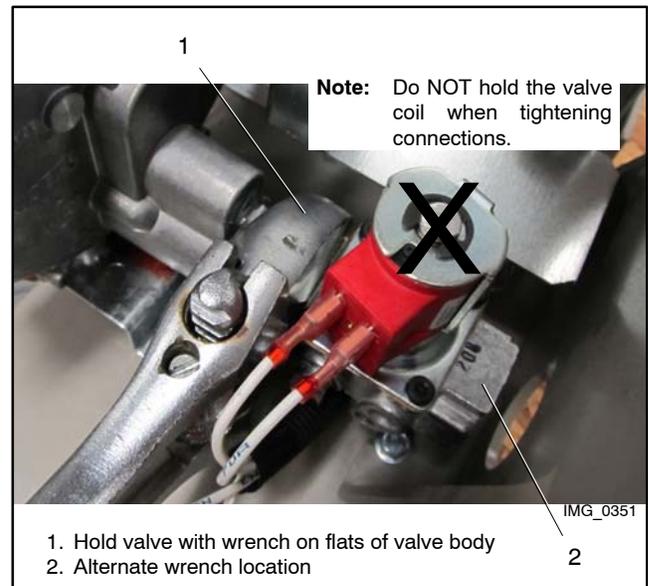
Holding Fuel Valve to Tighten Fuel Connections
